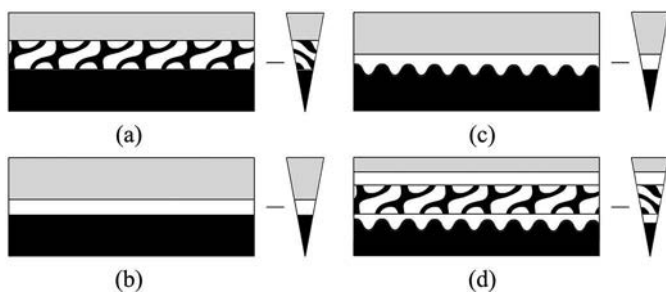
Examples of blade constructions, which are often encountered in the 10th–13th century luxurious knife blades (side view and corresponding cross section; black – ‘steel’, grey – ‘iron’, white – ‘phosphoric iron’): a) pattern-welded blade; b) striped blade; c) serrated/wavy-welded blade; d) more complex pattern-welded blade.
